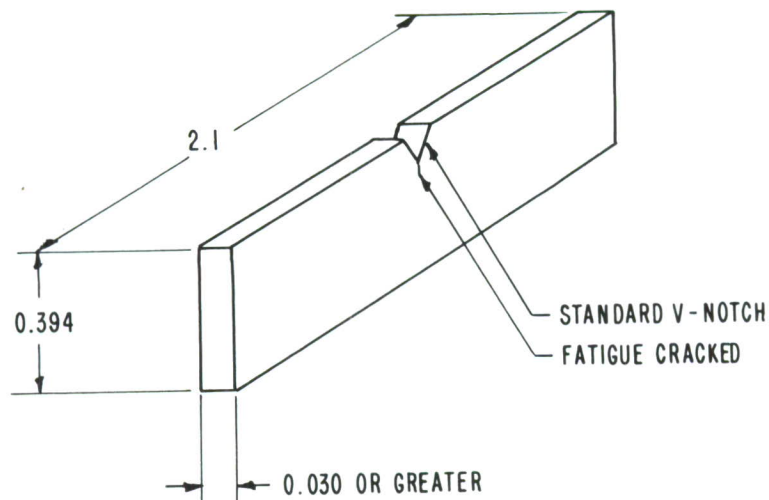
Fatigue Cracked Sheet Charpy Specimen (19)
